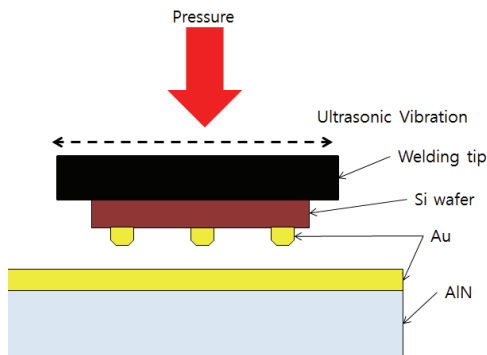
Schematic diagram of ultrasonic welding
